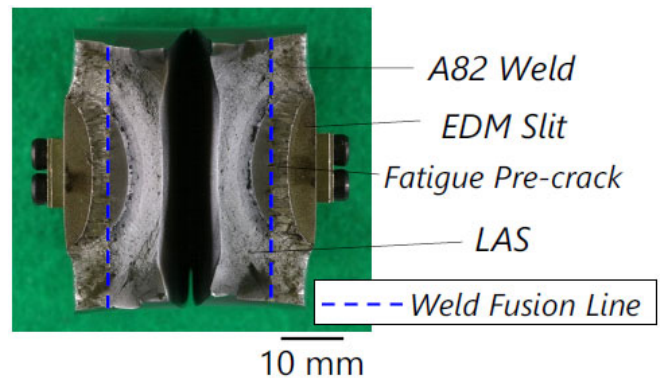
Fracture surface of DMW plate specimen. (LH-AW8)
